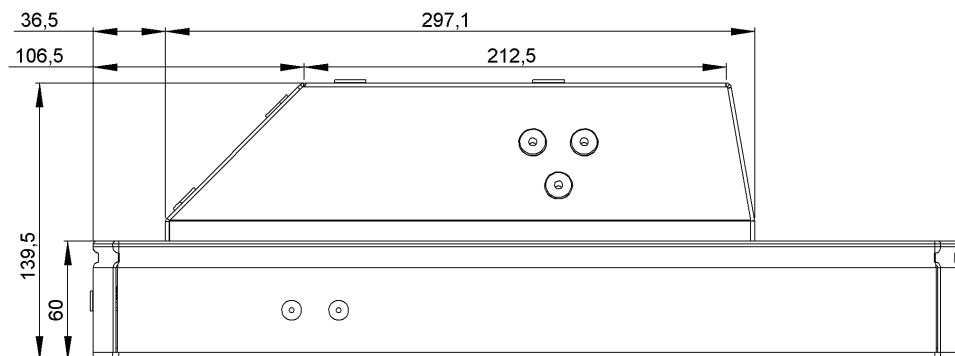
Unit depth, S19 stainless steel enclosure (all dimensions in mm)
